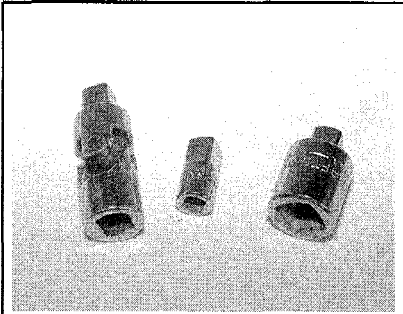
A swivel (U-joint) adapter (left), a 1/4 in.-to-3/8 in. adapter (center) and a 3/8 in.-to-1/2 in. adapter (right)
